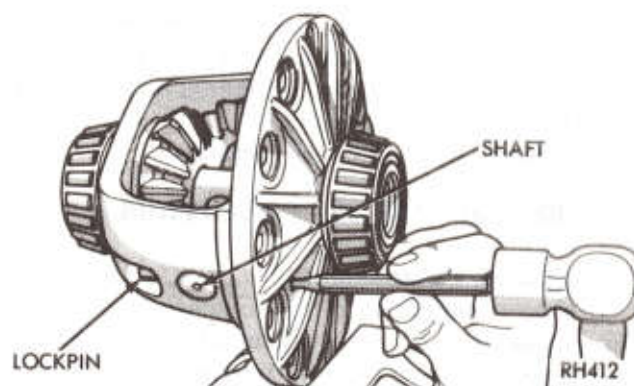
Removing Differential Pinion Shaft Lockpin (Typical)
